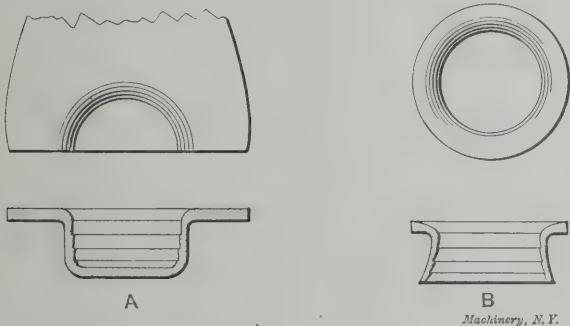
Sectional View of Drawn Rivet Shell, showing marks left by Stepped Punch
